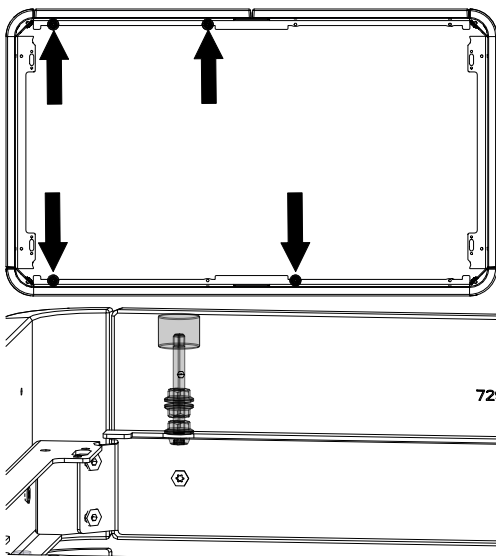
Mounting the screws, nuts and silicon metal buffer
